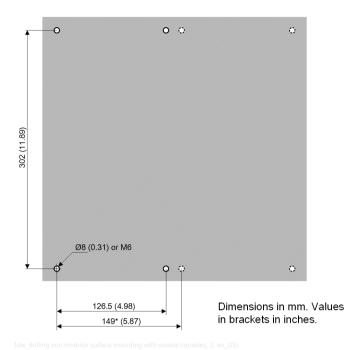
Drilling Pattern for a Non-Modular Surface-Mounted Device – Several Consoles
